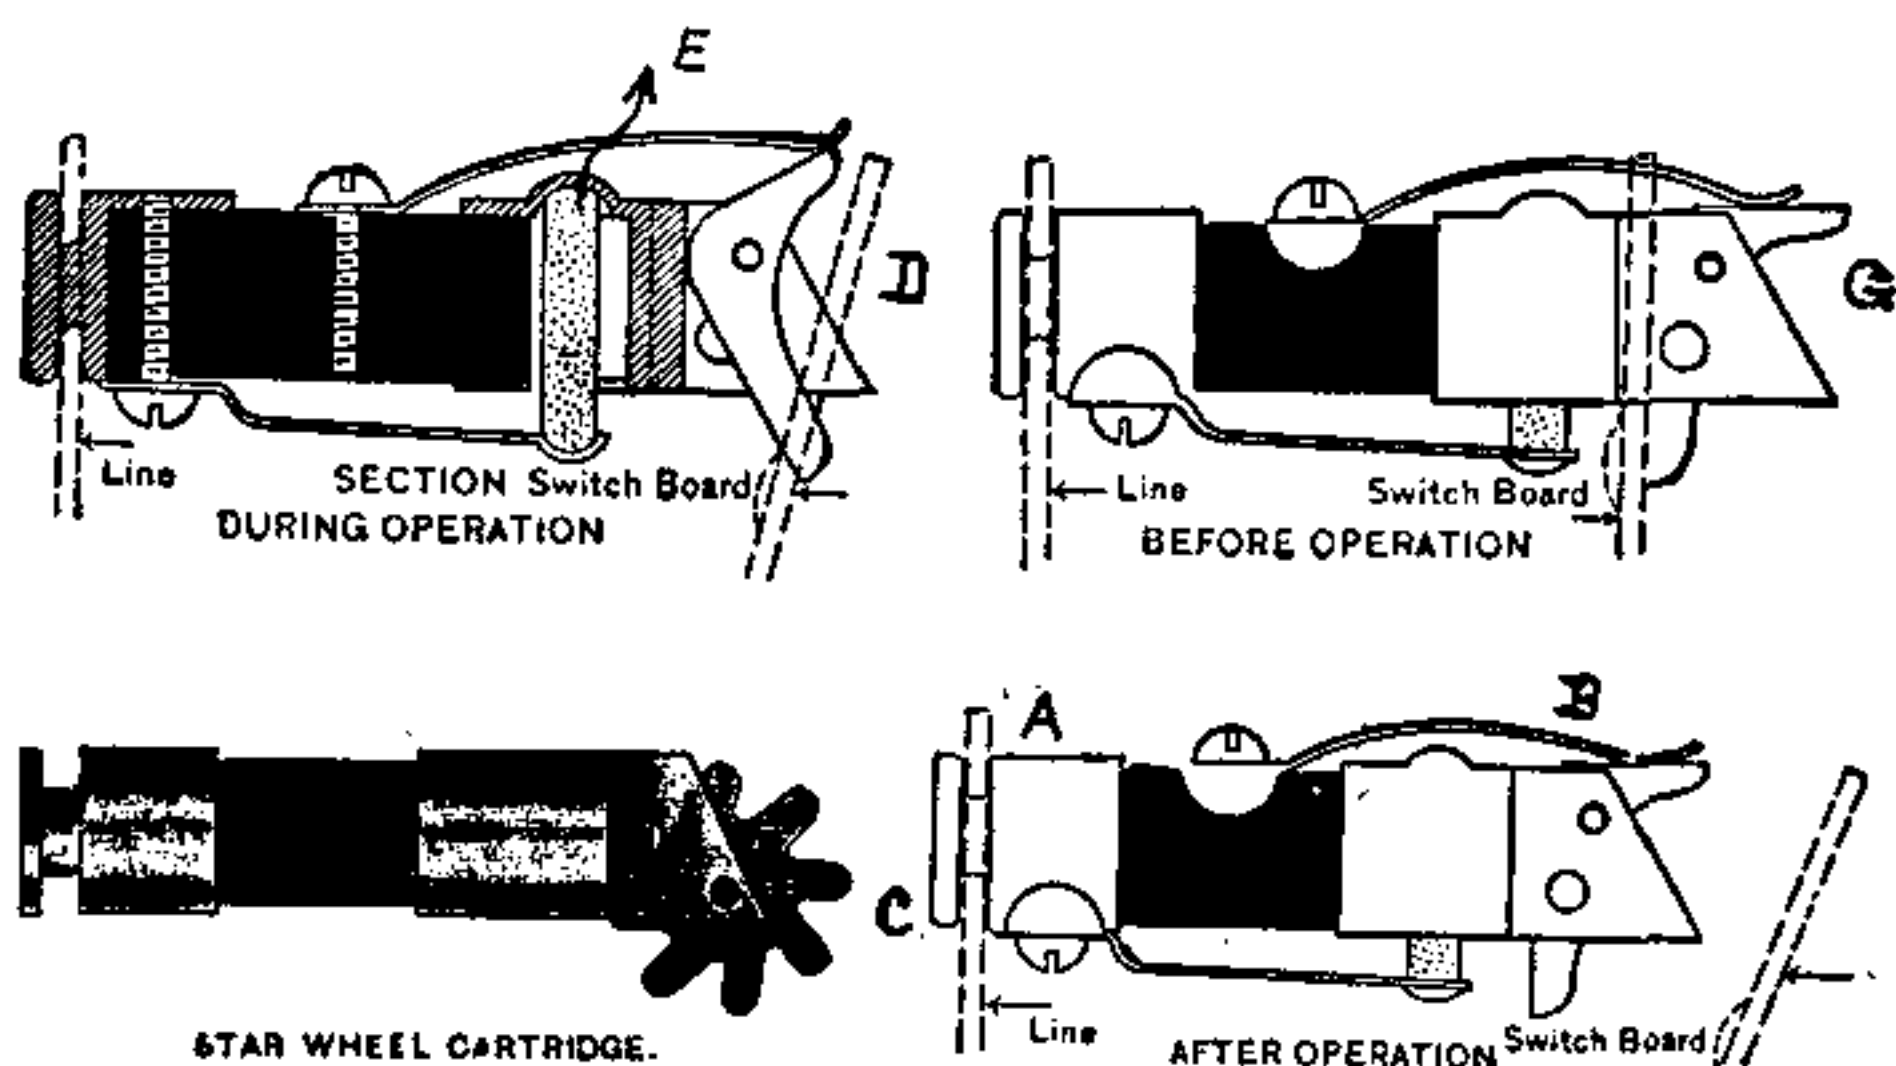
HEAT COIL OF ROLF PROTECTOR.
